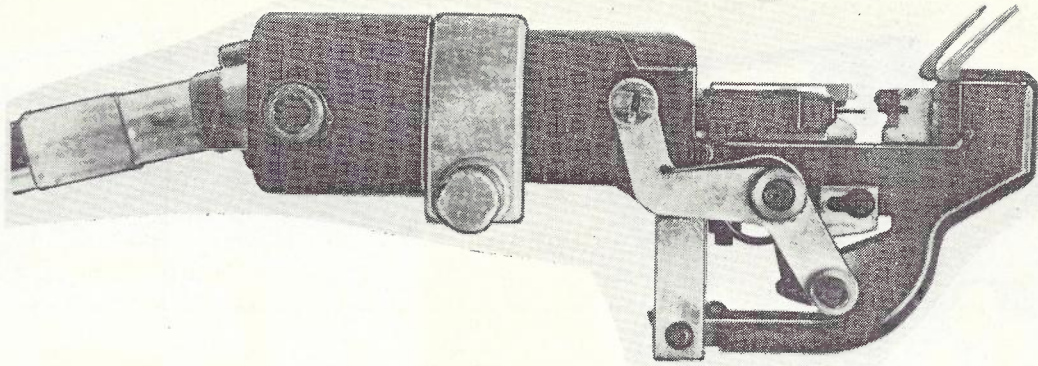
Machine Cable Jointing No. 50 (Jointing Head and Support Frame).
